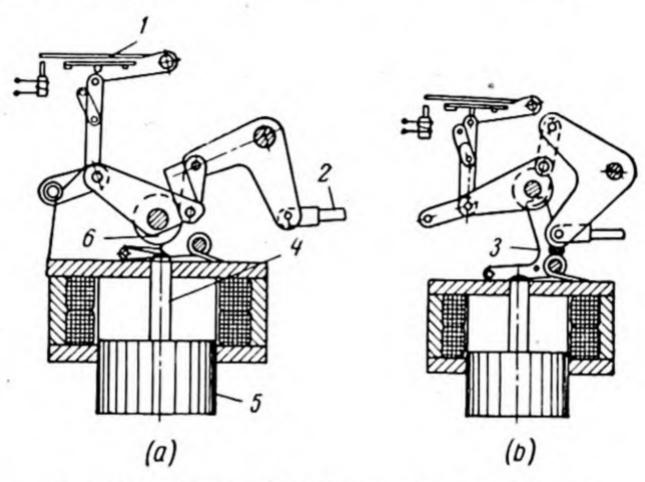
Linkage of IIC-30 operating mechanism: a—open position; b—closed position: I—latch plate; 2—tie rod to circuit breaker; 3—hold-in catch; I—push rod; 5—operating-mechanism closing coil; 6—roller
